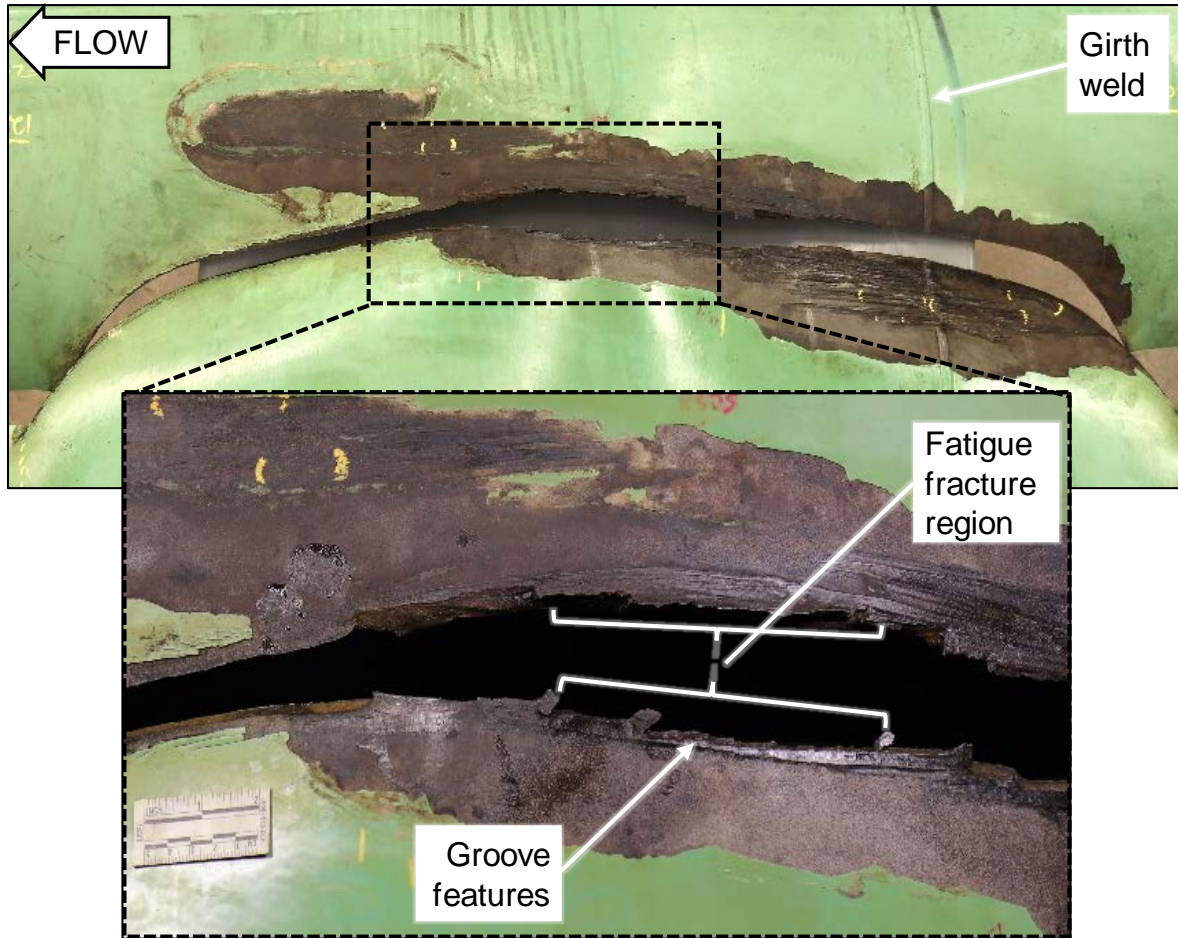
Overview of the pipe fracture with mating sides of the fracture placed adjacent to each other. The inset image shows a closer view of the fatigue fracture initiation region and a colony of sliding-contact grooves.
